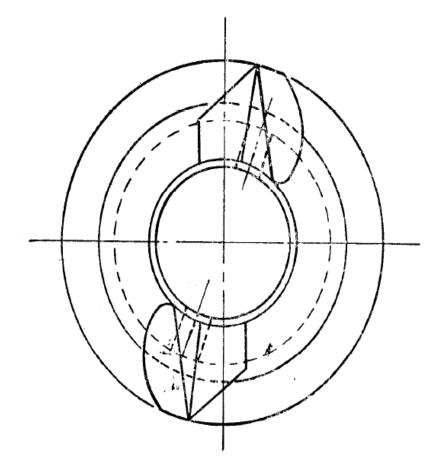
B BOTTOM CAM FOR FALLER SCREW (LH) (Second jute drawing frame)
